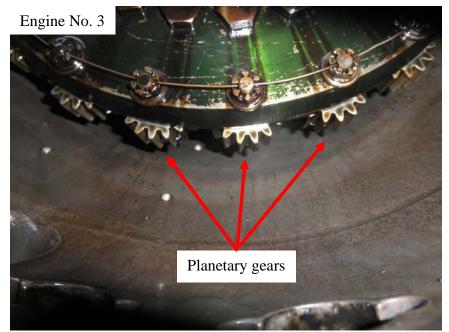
Close up of the planetary gears showing that they were intact and there was no damage to the gear teeth.
